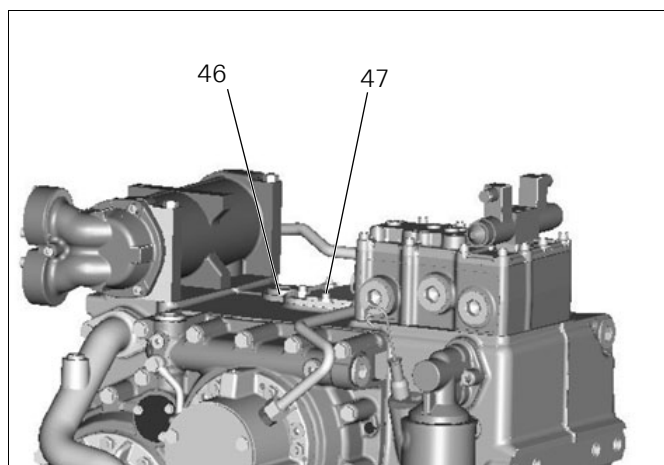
Oil filler screw (46) and inspection cover (47) for ZF 2000 A (example)
